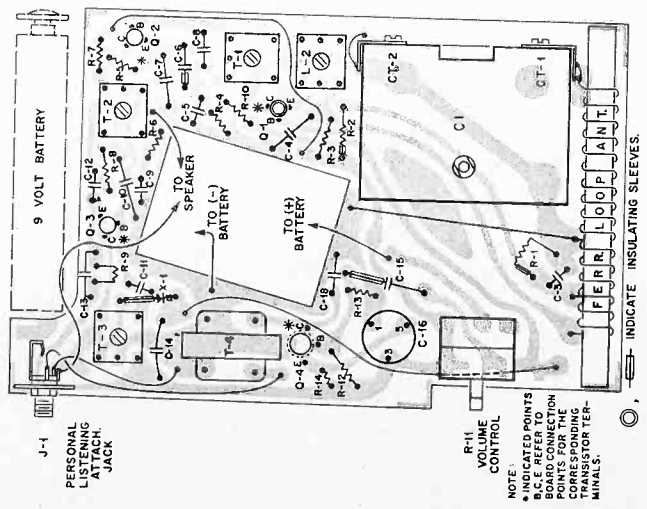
PRINTED CIRCUIT CHASSIS DIAGRAM (TOP VIEW)
